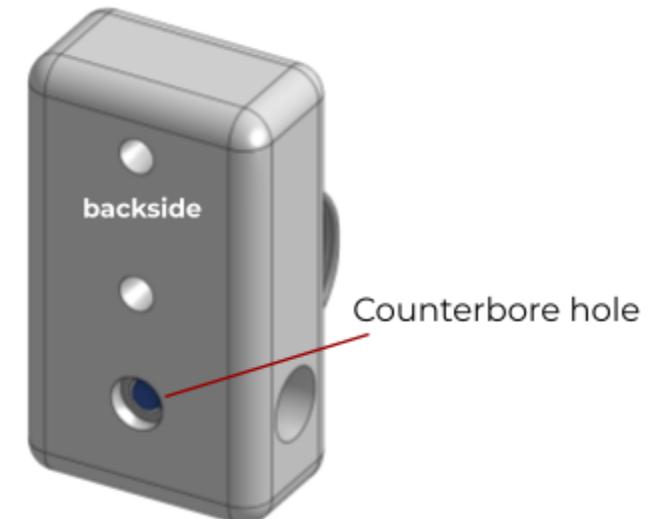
Back side of Carriage indicated by counterbore on lower hole of side carriage.
